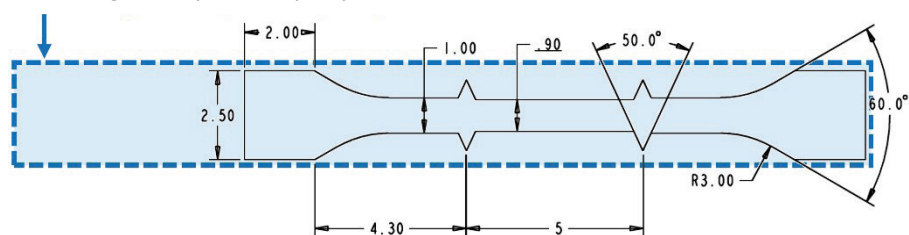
Miniature tensile specimen cut out of the cast elongated square shaped parts by wire EDM
